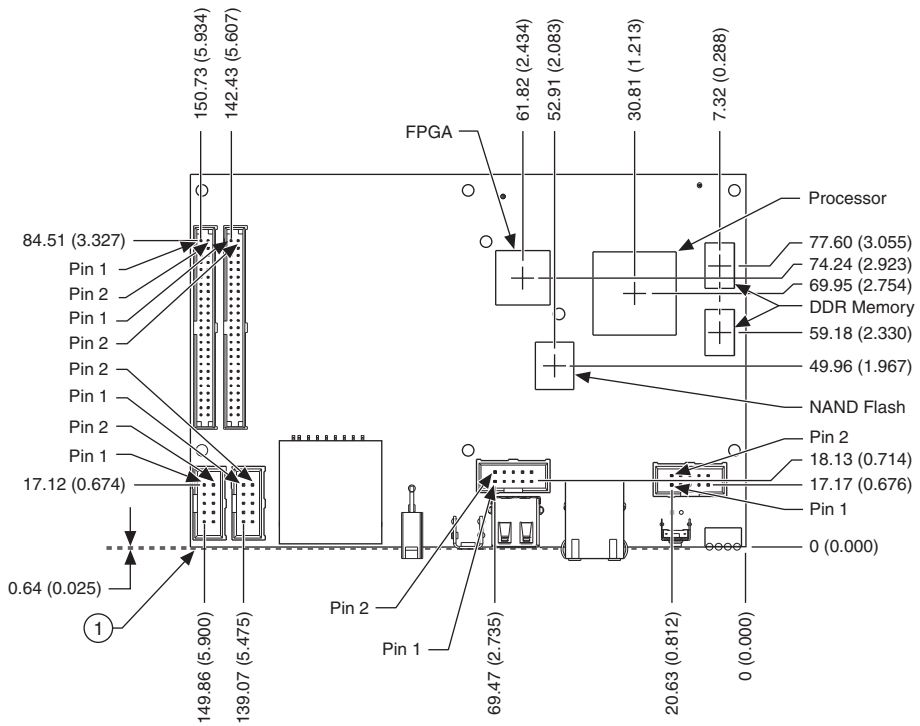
NI sbRIO-9605/9606 Secondary-Side Dimensions in mm (in.)
